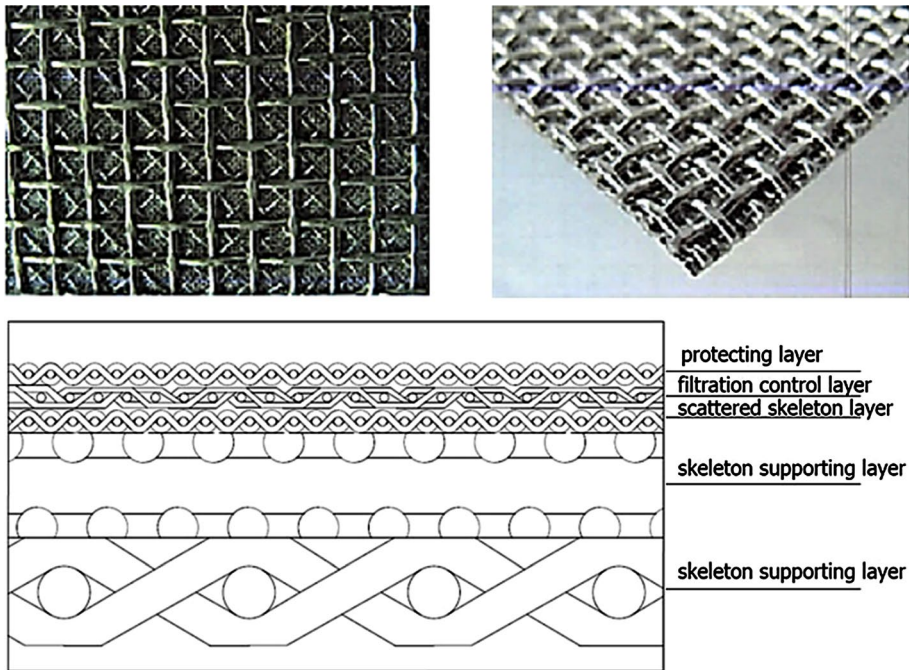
Examples of sets of wire meshes: the different mesh layers can be connected by sintering or welding
